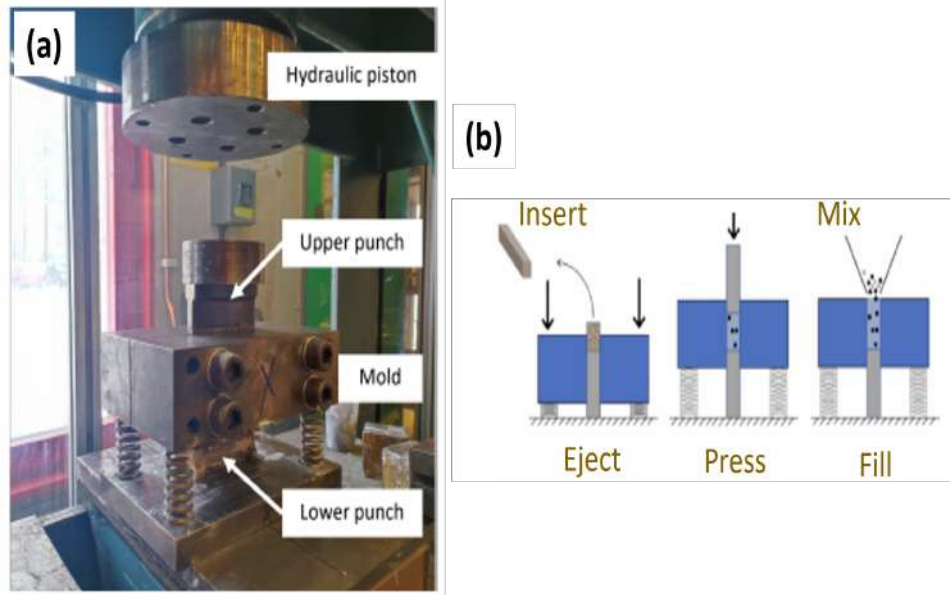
(a): Pressing machine configuration and parts, (b): Steps of manufacturing inserts.
